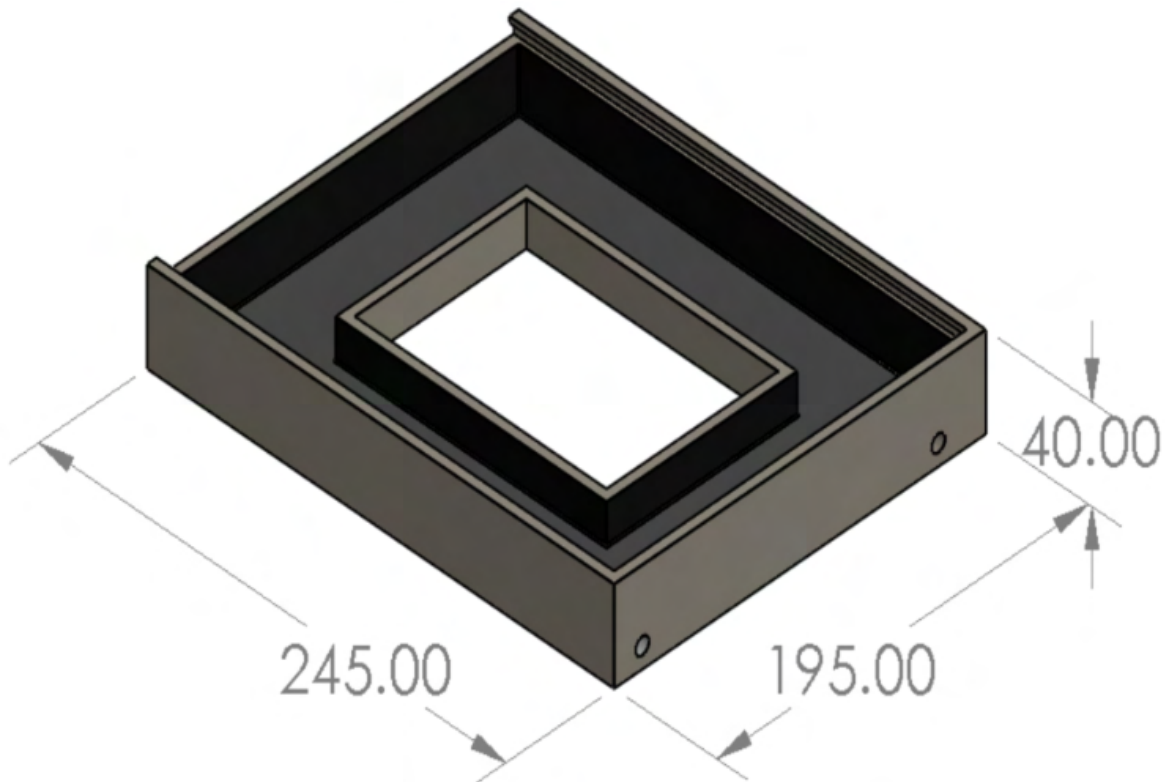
3D Printed Box with insulation coating drawing with dimensions in millimeters.
